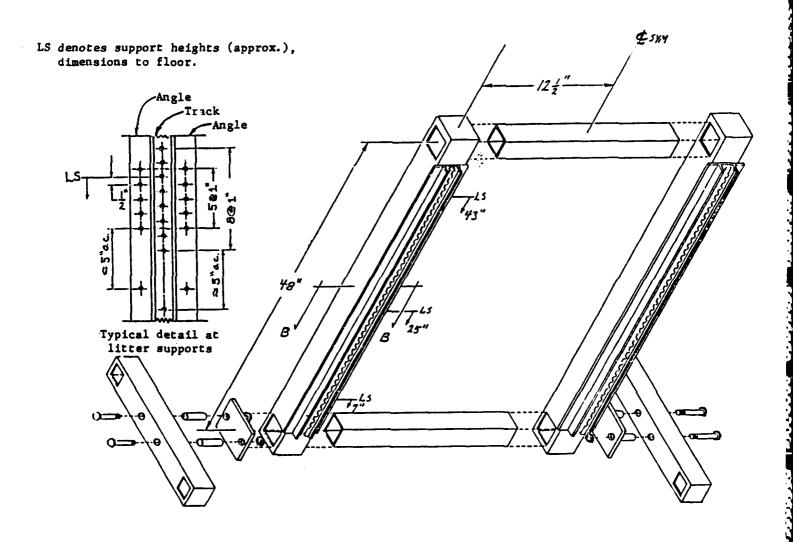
Exploded view of vertical assembly. (See Fig. 3 for Section B-B.)
